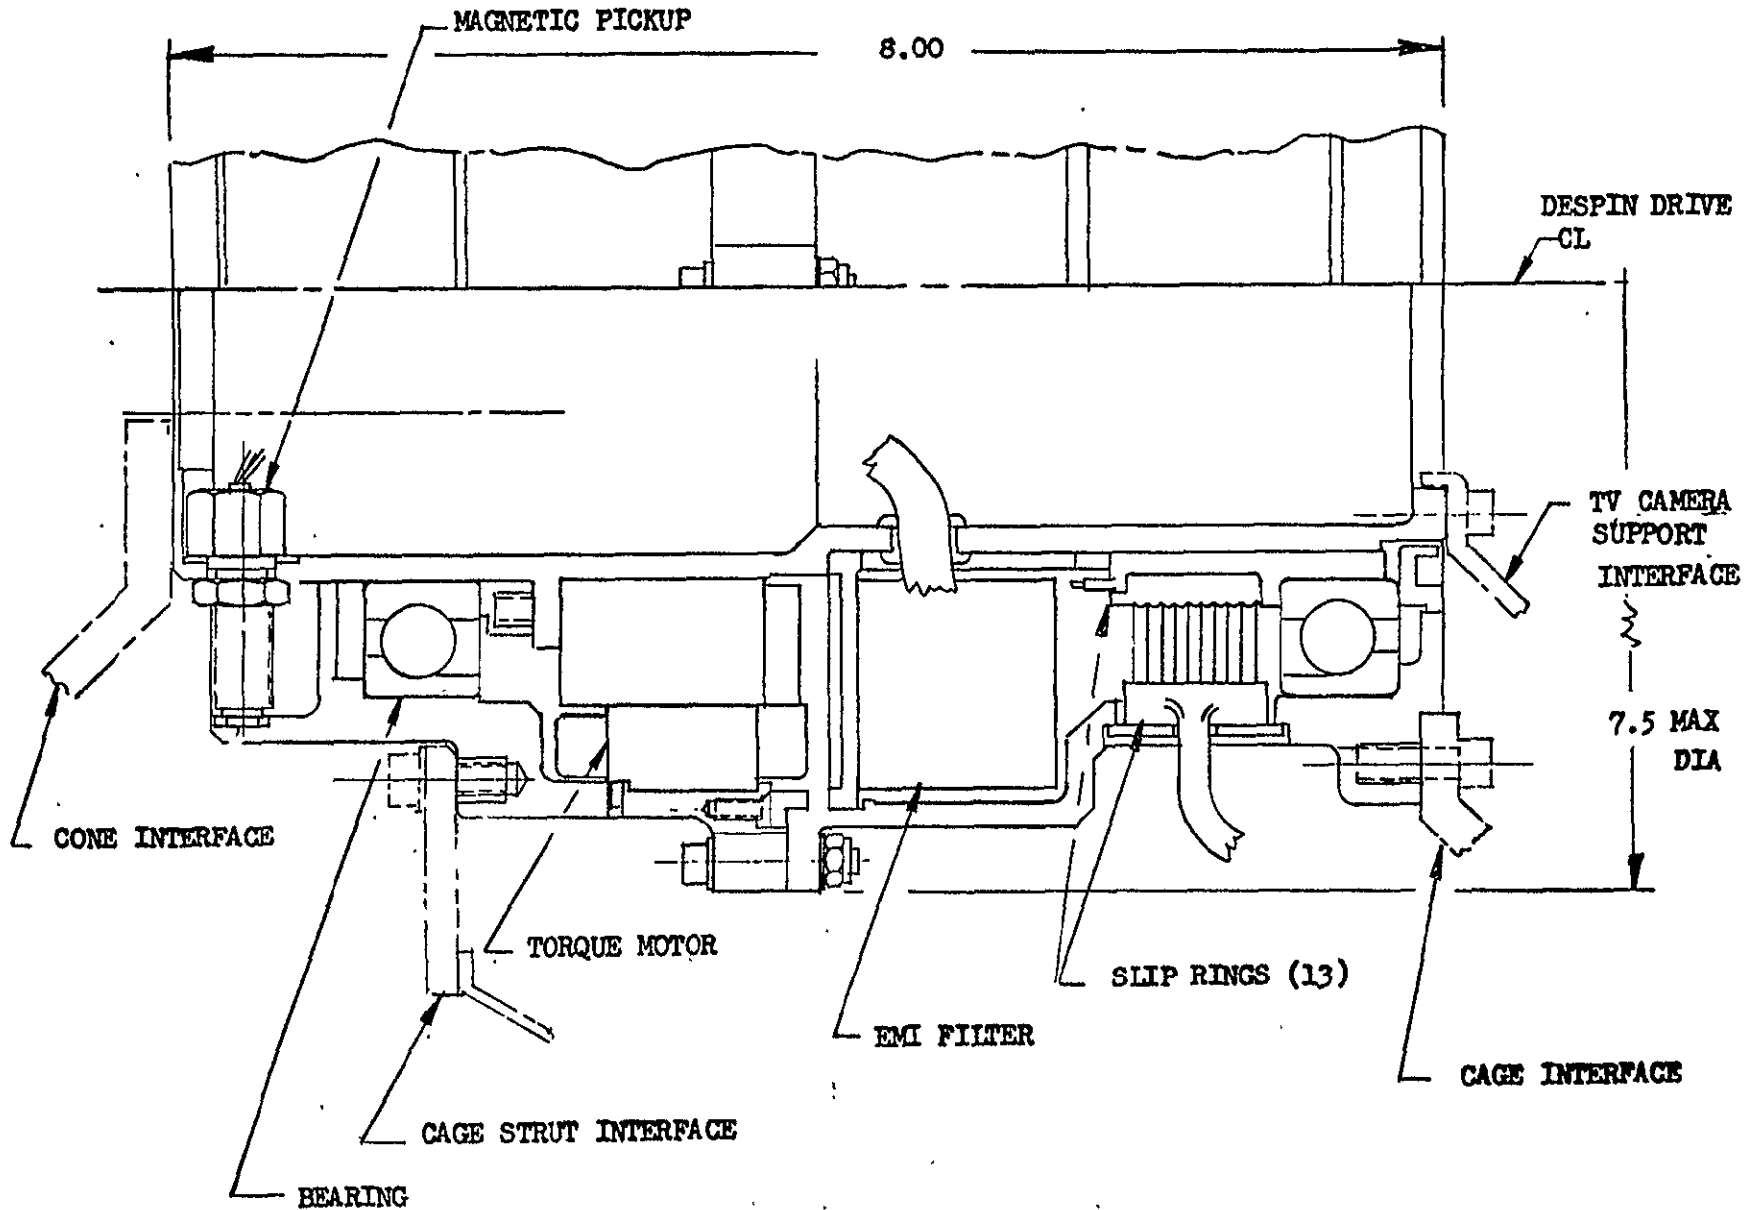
DESPIN DRIVE ASSEMBLY
